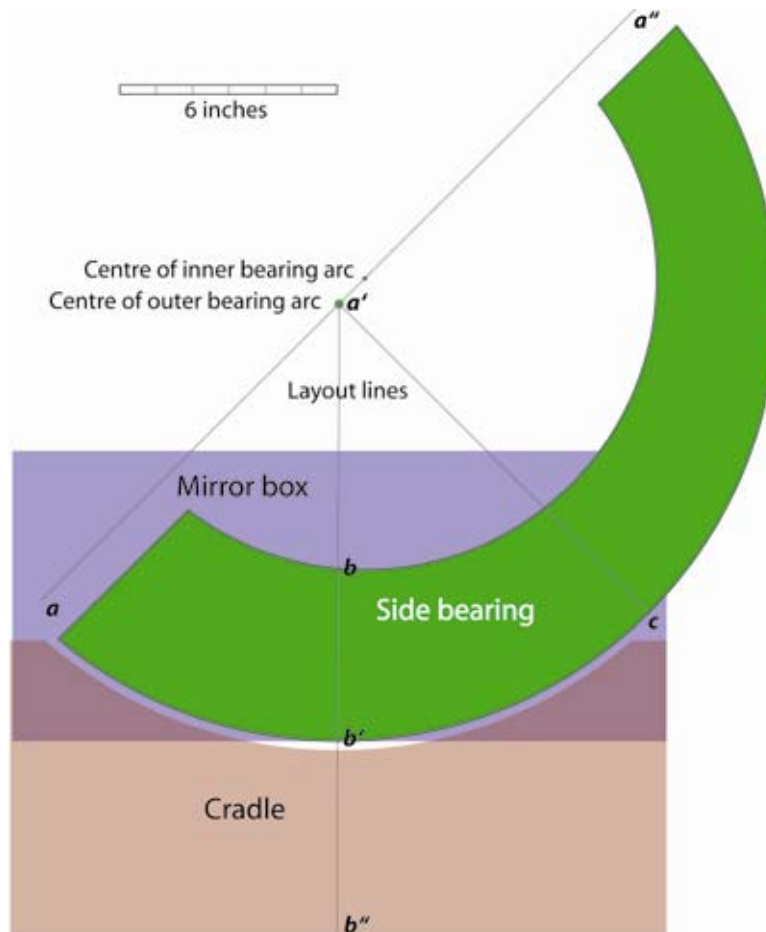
Side bearing with radii of arc 12" and 8", mirror box and cradle. The center of the outer bearing arc is the center of gravity of the telescope equipped for observation. The  $\frac{1}{4}$ " gap between side bearing and cradle is exaggerated in the drawing.
